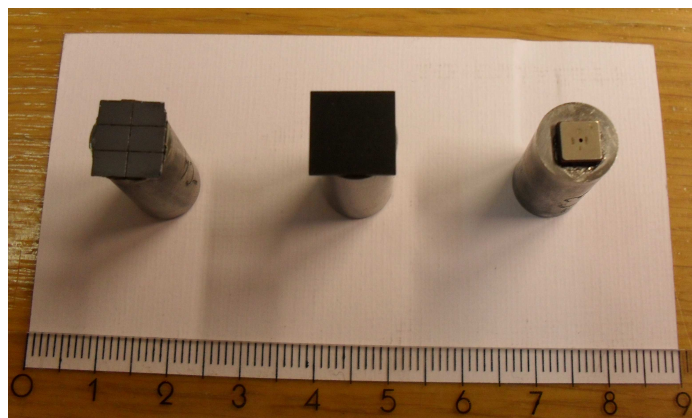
Package test heads for the adhesion testing. Silicon surface (left) has been built from six WLPs, small polymer package is replaced with a BGA and ceramic/stainless steel package is used as such
